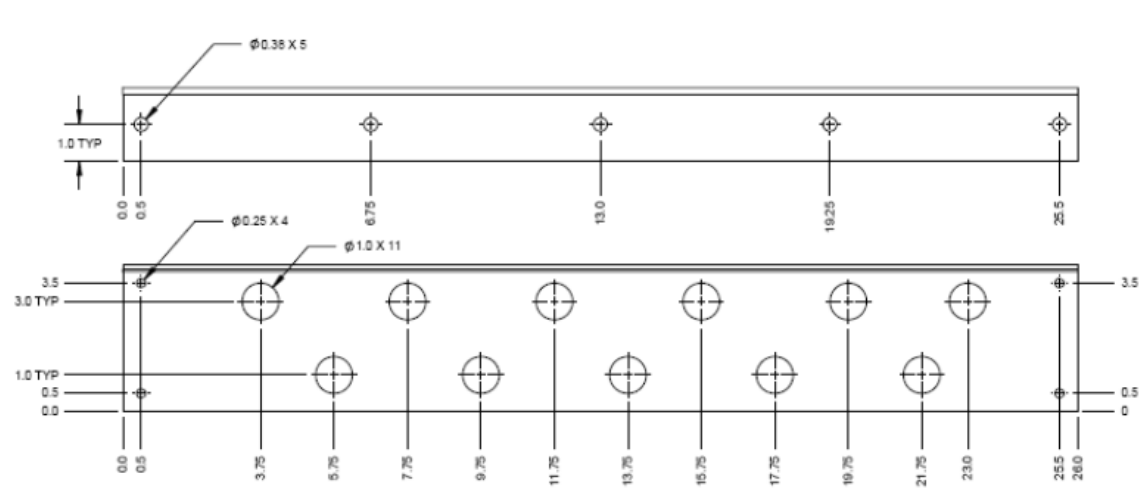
Stryker-supplied Gas Riser with Check Valve Mounting Bracket
